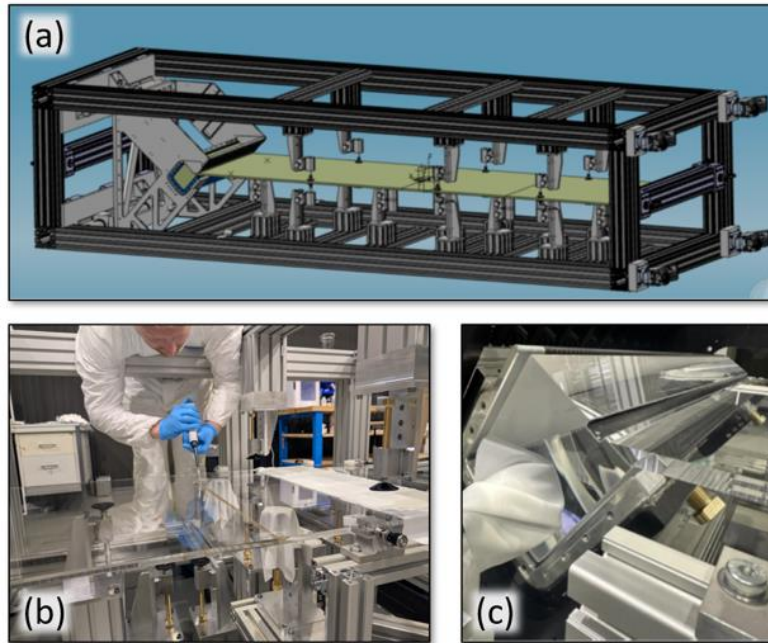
Bonding of the TORCH optical system. CAD drawing of the support frame and bonding jig (a) with the optics highlighted in green. Photos of the gluing process between two plates (b) and of the completed joint between the top plate and the focusing block (c).
